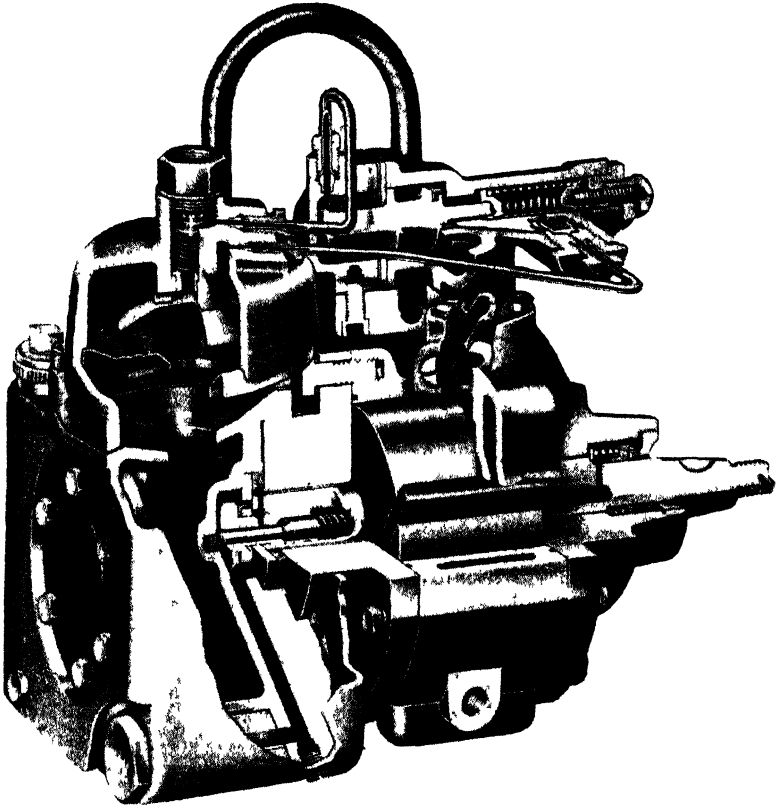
CUTAWAY VIEW OF WAGNER AIR COMPRESSOR.
